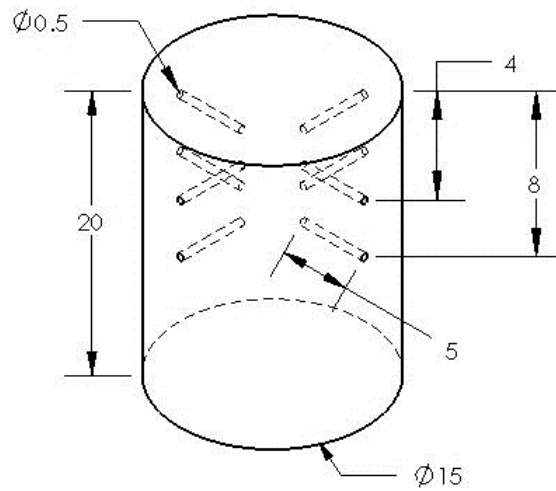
CAD view of the thermocouple positions (all dimensions in mm).
